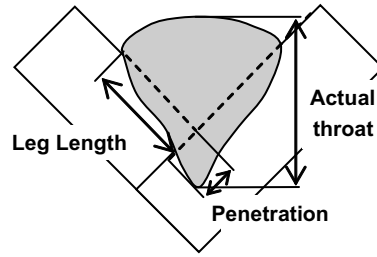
Nomenclature of the weld geometry in GMA fillet weld.
